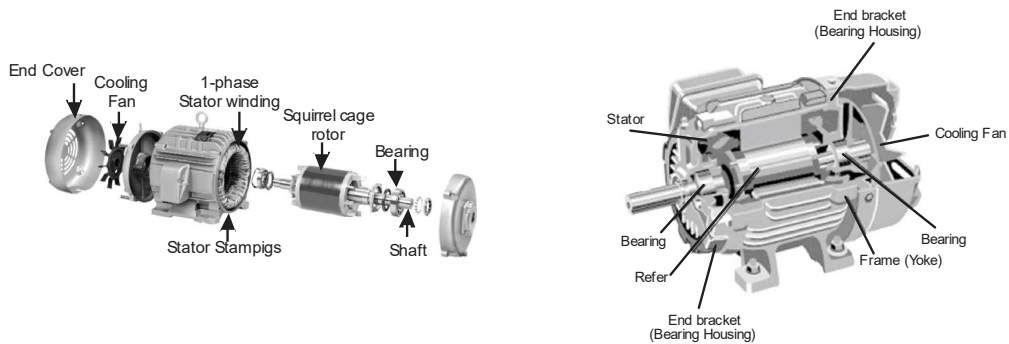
(a) Disassembled Parts of a 3-phase Induction Motor Fig. 3.2(b) Sectional view of a 3-phase Induction Motor
